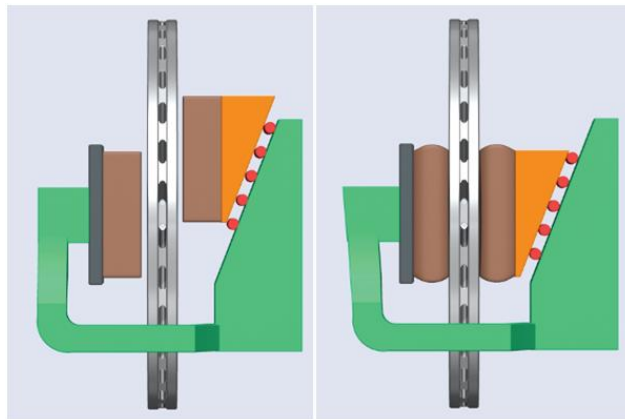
Wedge principle used in the electronic wedge brake (EWB). Figure from [93].
